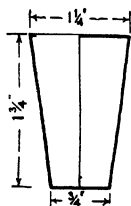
Pattern for Shape of Shoulder at End of Scroll Block.
